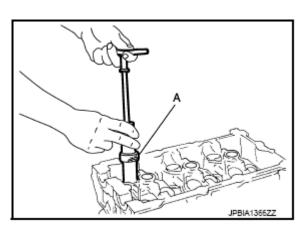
Compressing Valve Spring Using Valve Spring Compressor Courtesy of NISSAN NORTH AMERICA, INC.
